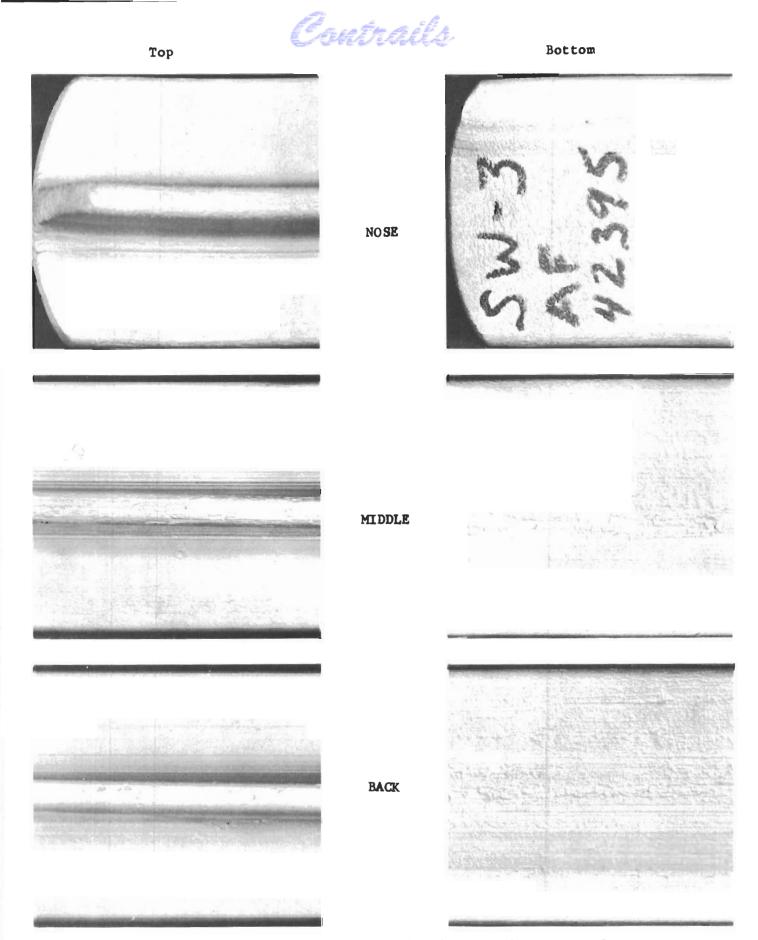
As-Extruded Surface of Pressed and Sintered Tungsten-3 Percent Molybdenum Extrusion 25 (Billet Code SW3) (Magnification 1-1/2X)
